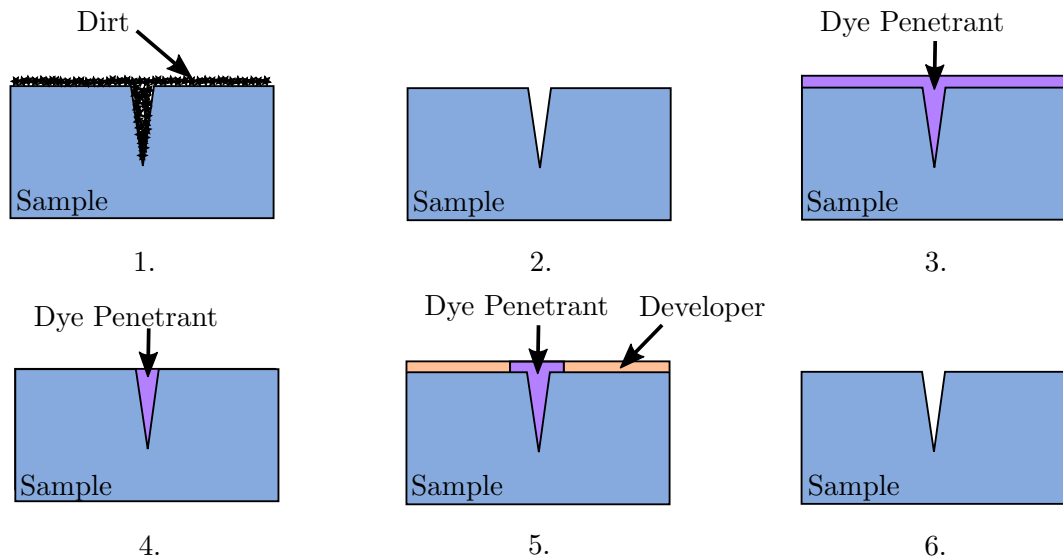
To perform a dye penetrant test, the test piece (1.) must first be cleaned (2.) before a liquid dye is applied and allowed to seep into surface breaking defects (3.). Excess dye is then wiped from the surface (4.) before a developer is applied to draw the dye from any cracks to provide indications for defect location (5.). The sample must then be cleaned again (6.).
